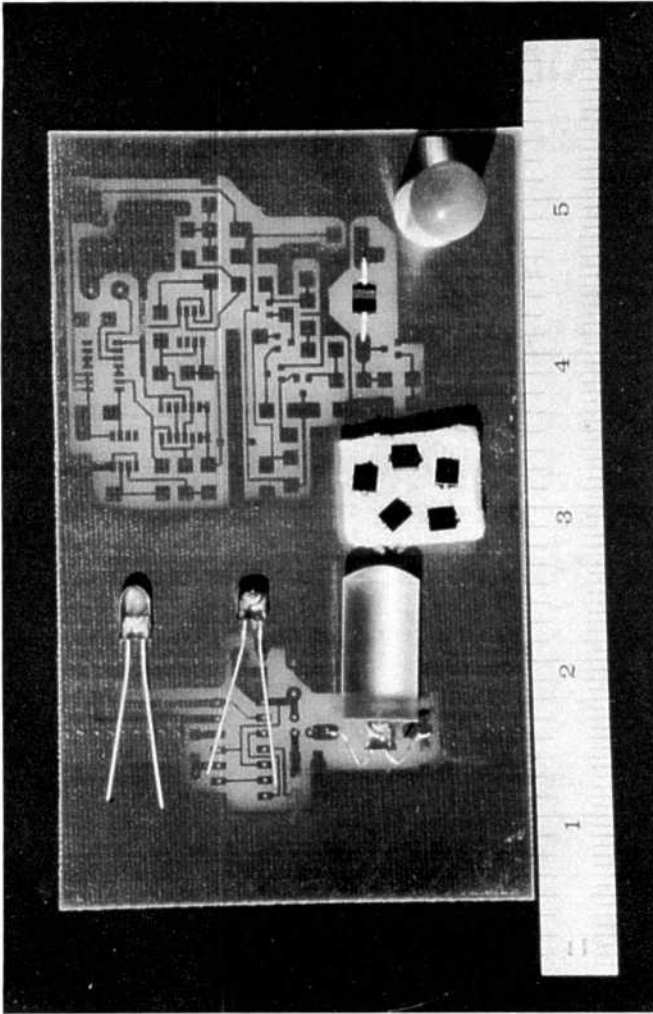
Transceiver PCB shown with detectors (right) and emitter (left) and short-range molded lenses.
